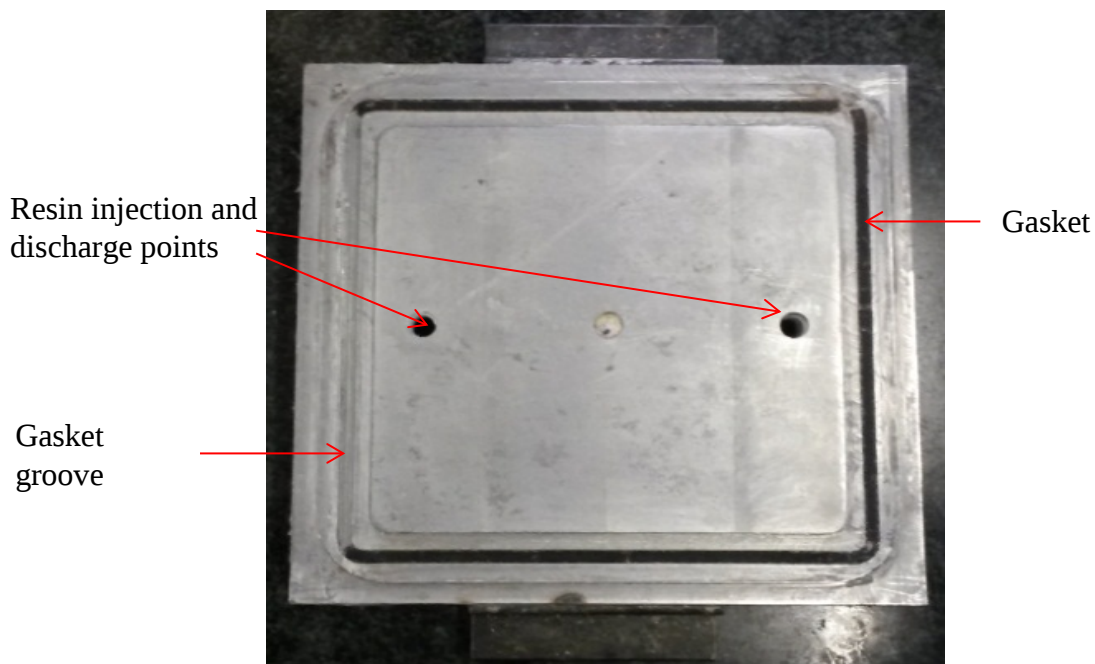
Male mould piece indicating gasket and resin injection/ discharge locations
